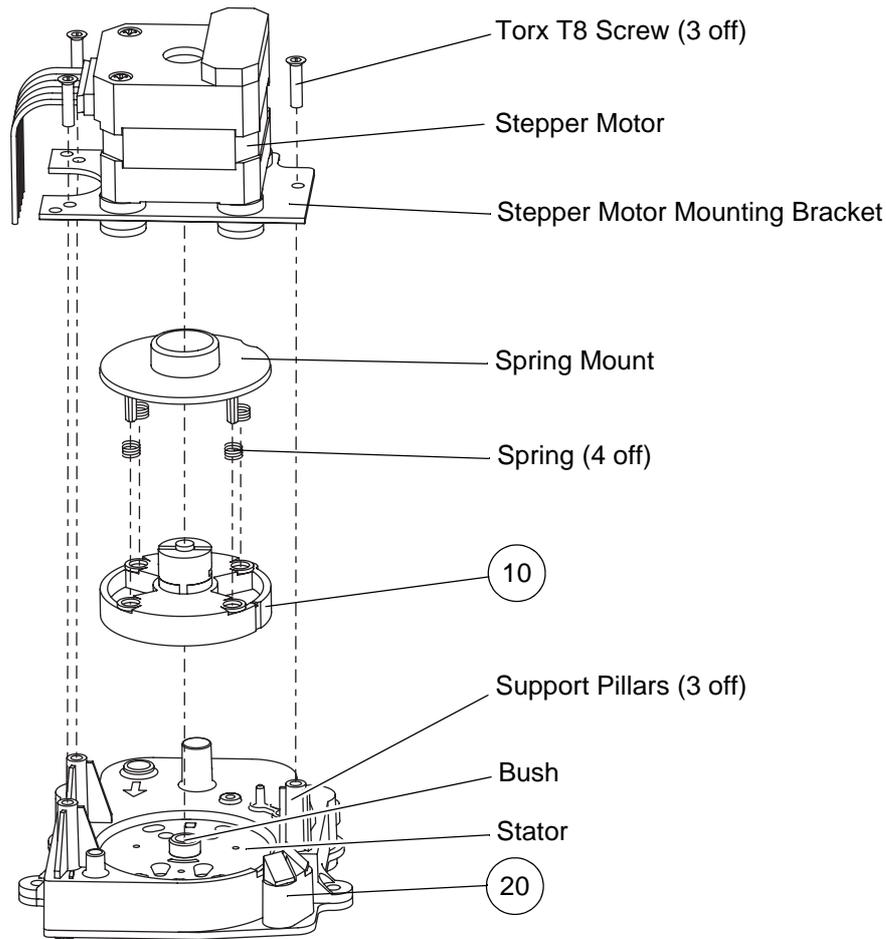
Replacing the Motor and Manifold Sub-Assemblies
